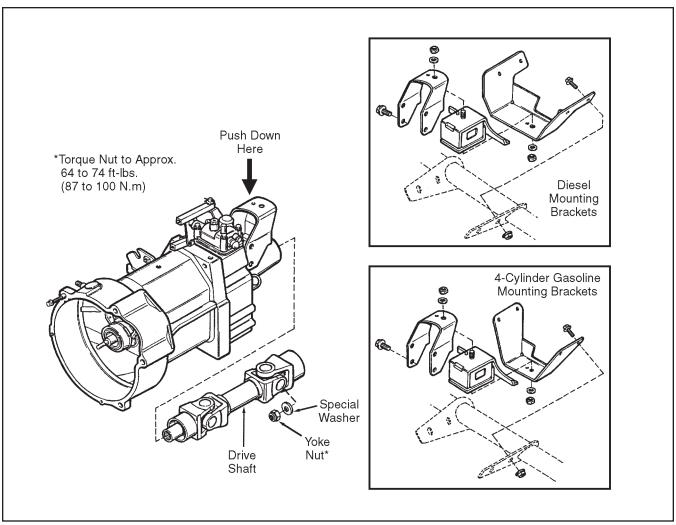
C-2. Drive Shaft Removal and Installation — Vehicles with 4-Cylinder Gasoline Engines and Diesel Engines
